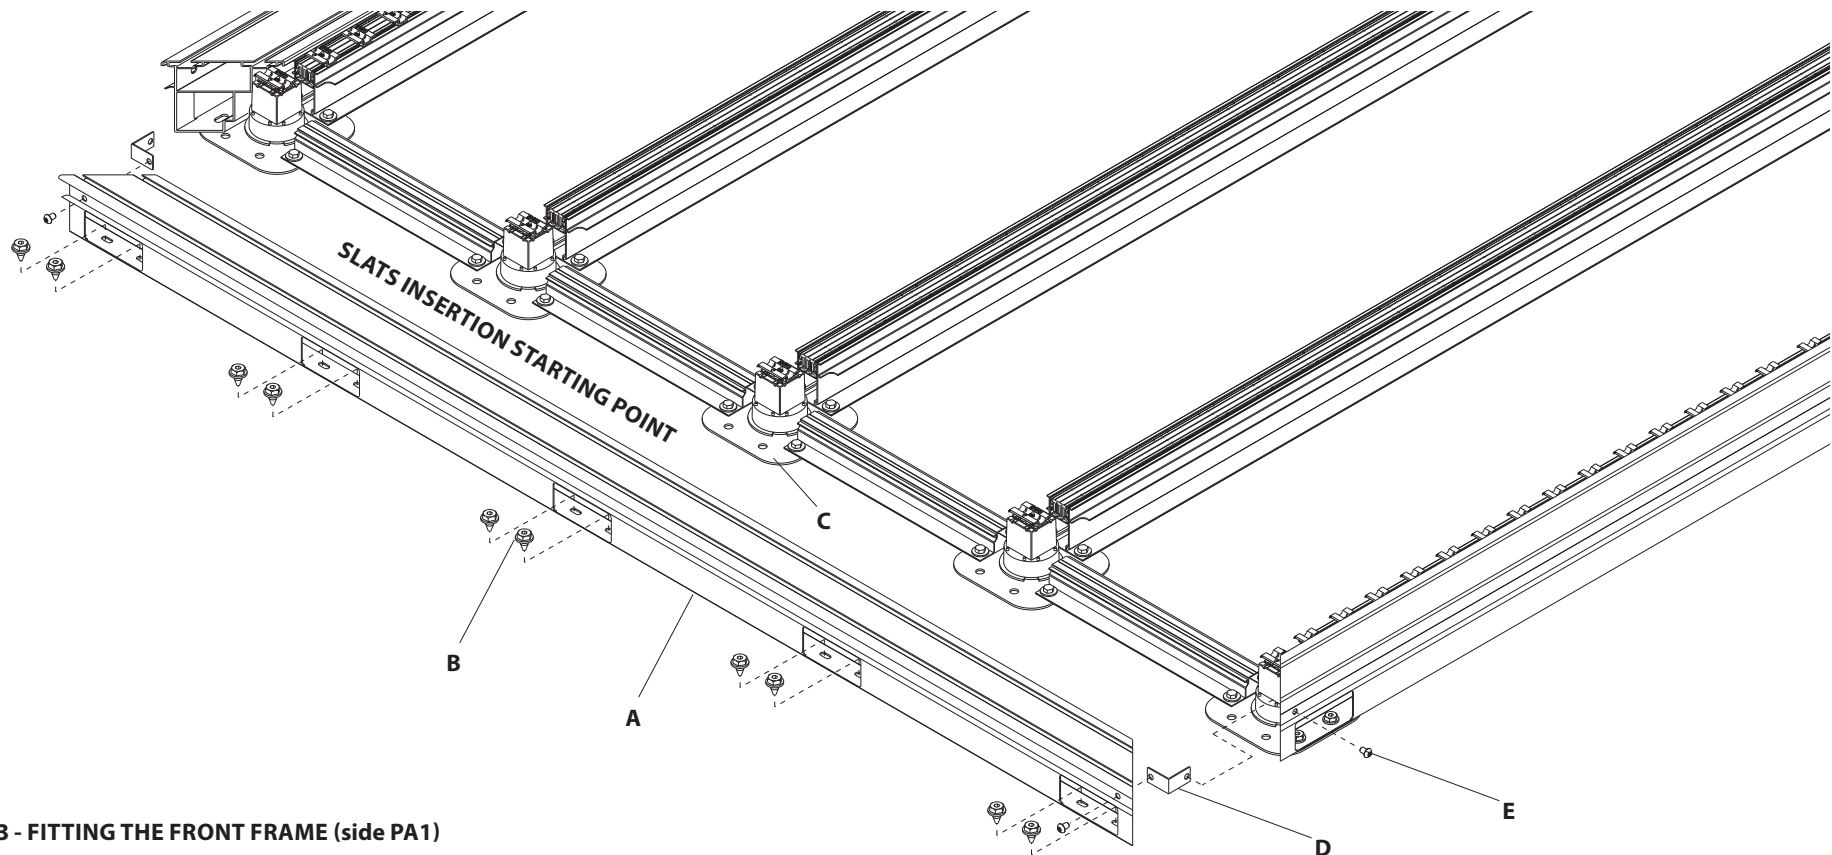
FITTING THE FRONT FRAME (side PA1)
